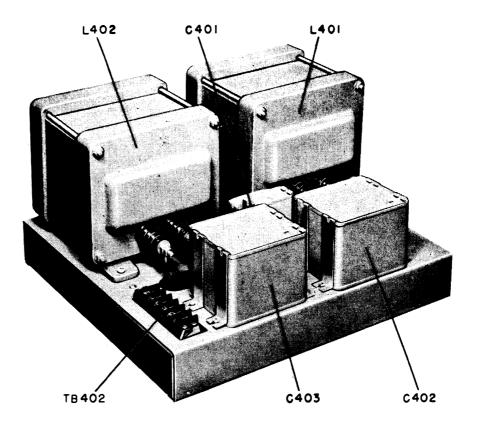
High-Voltage Power Supply, Filter Chassis, Top View, Location of Parts
